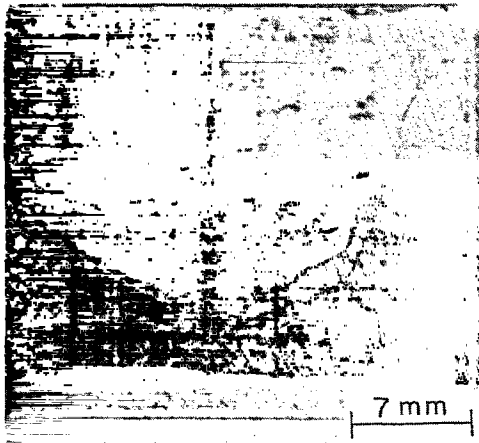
Fracture surface of specimen F, an HY-130 GTA weldment
